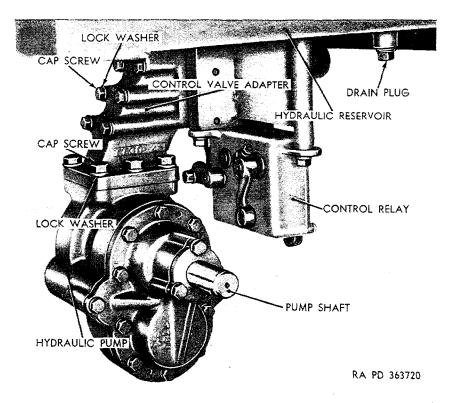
Right front view of hydraulic hoist pump mounting M51. .
